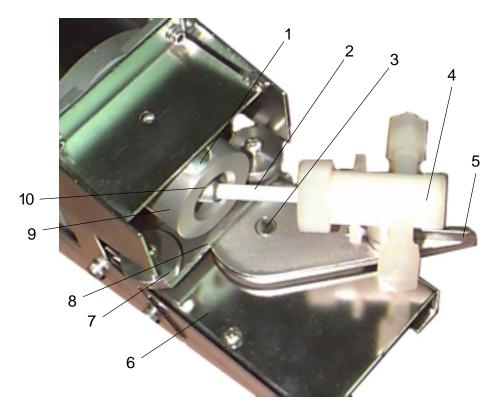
Swing Adjust Pump Module Assembly/Disassembly
